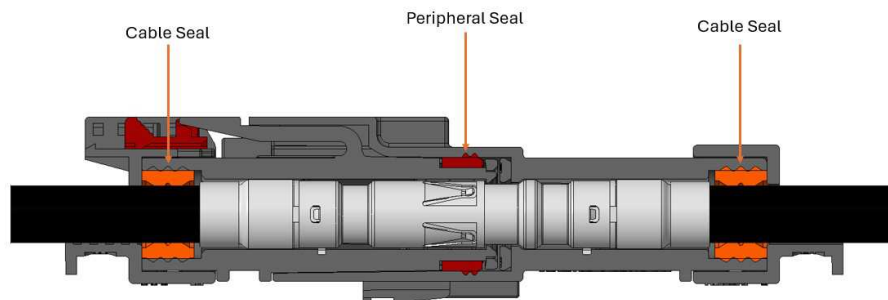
a: DT Highspeed Pin Assembly mated to Socket Assembly
